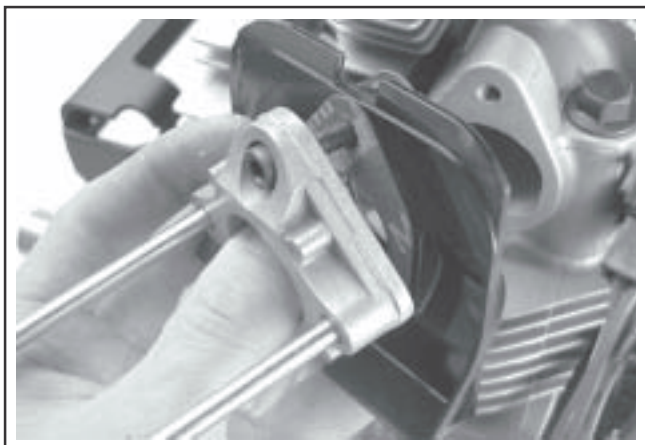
Removing Carburetor Adapter and Heat Deflector.
